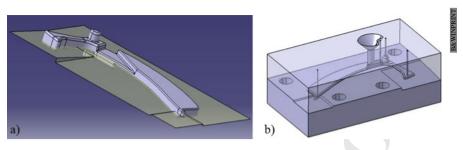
a Splitting plane and b 3D assembly of two-component casting tool
